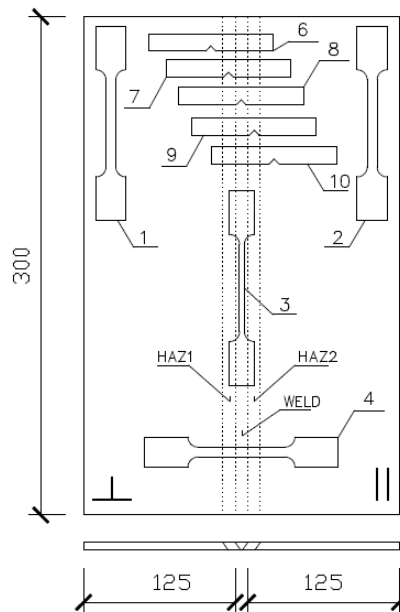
Distribution of samples for starting tests and butt welds testing
